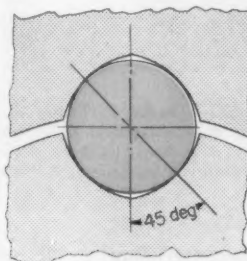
Cross section of grooves in ball-bearing spline. Gothic-arch configuration reduces backlash by limiting radial and angular movement.
